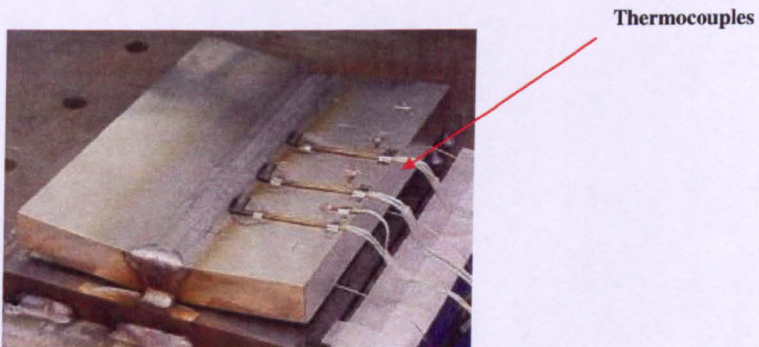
TIG groove weld plate (3D view)
